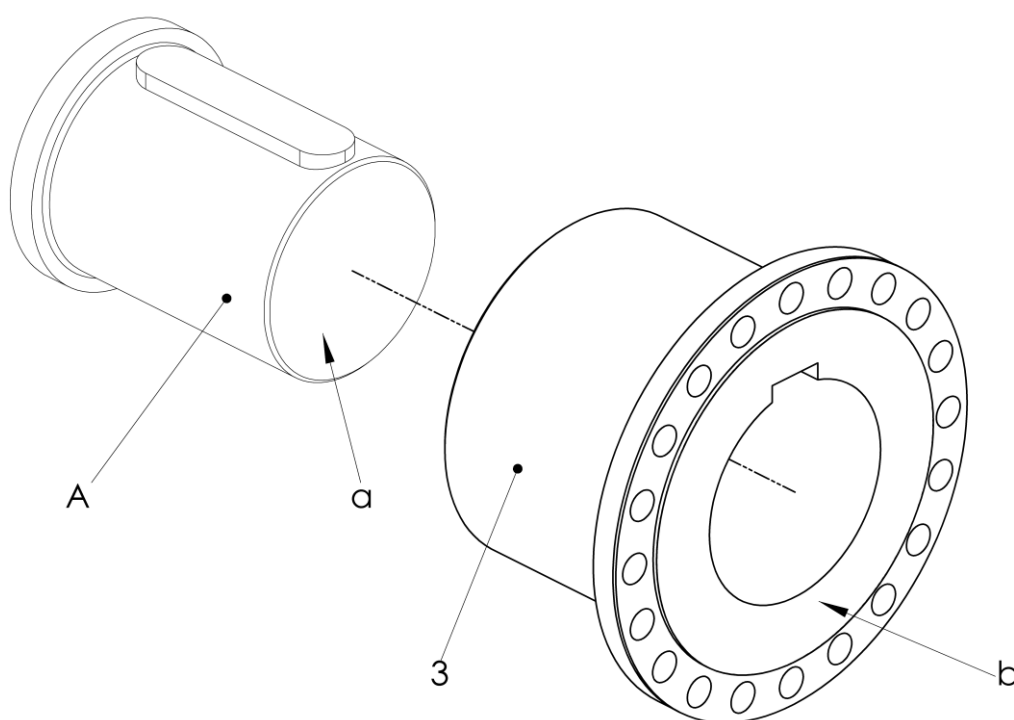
Mounting the hub with cylindrical bore and keyway
